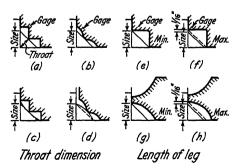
Fillet weld gages. From H. Malcolm Priest, Practical Design of Welded Steel Structures, American Welding Society.
